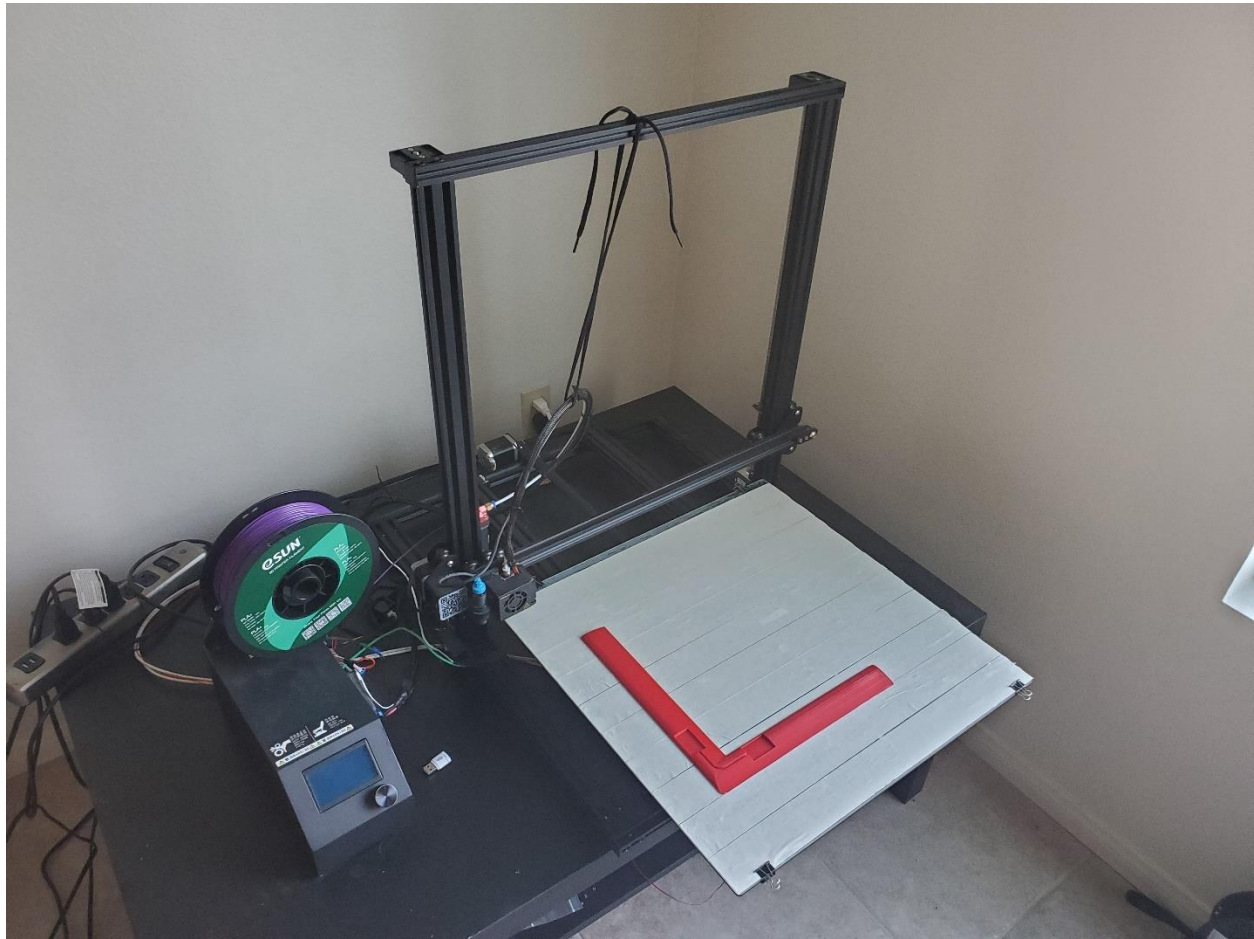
Creality3D CR10S5 3D Printer used to Print Traditional–V Boomerangs
